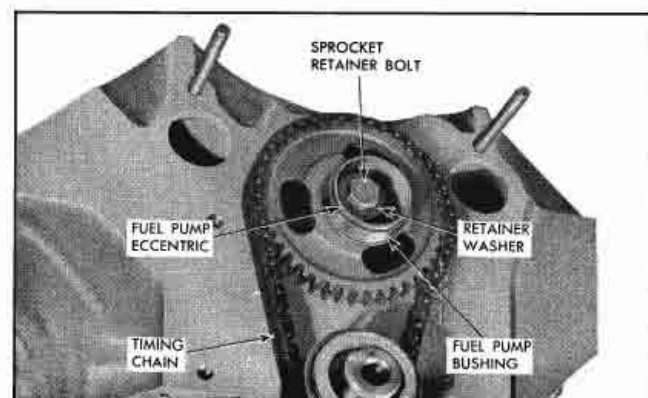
Front of Engine with Timing Chain Cover Removed
